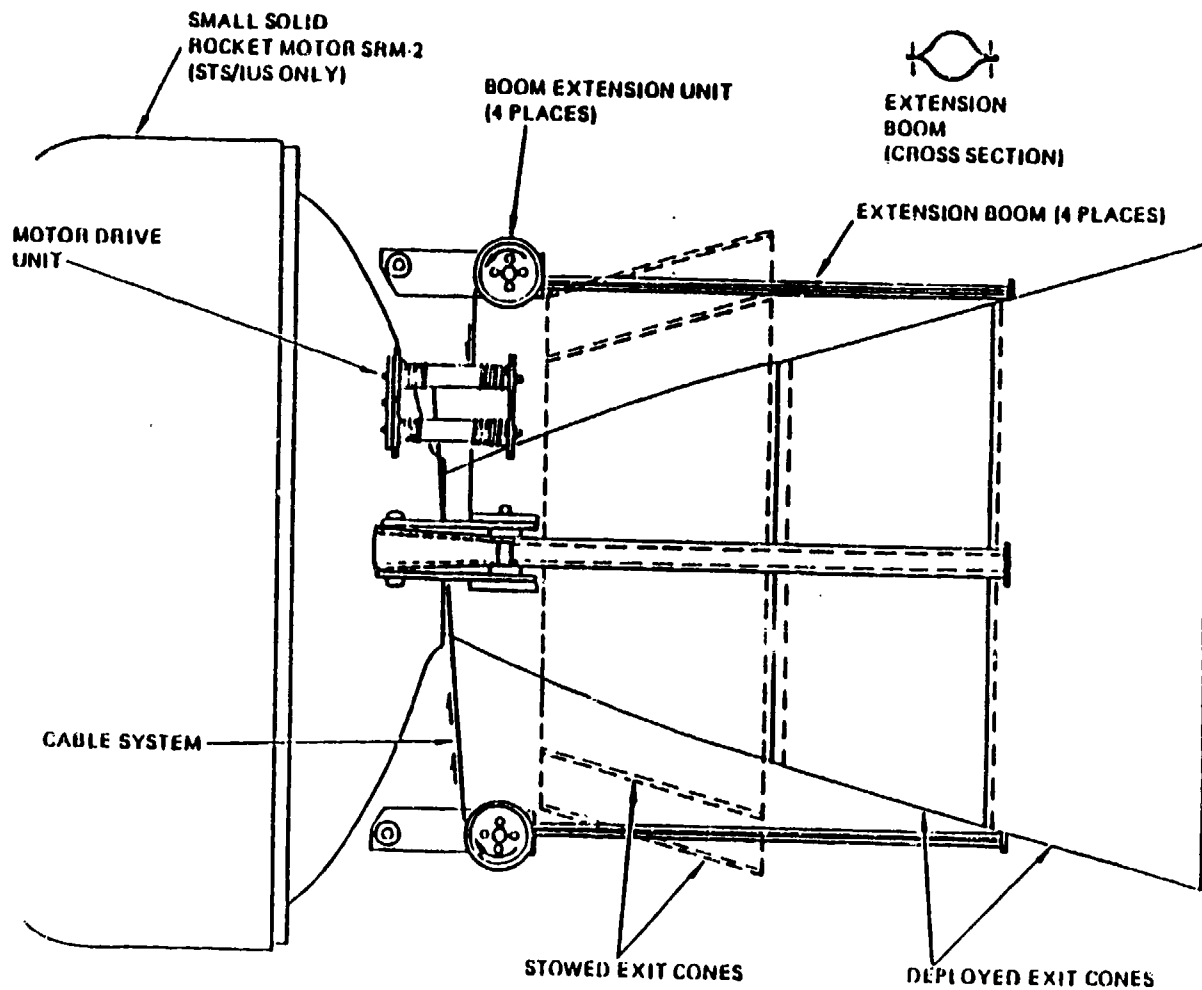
Extendible Exit Cone Deployment Mechanism
